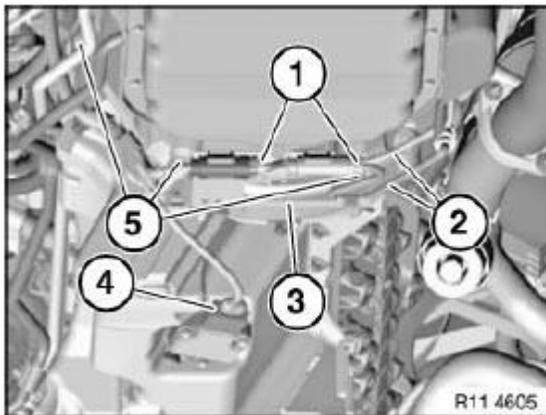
Identifying Plug Connection, Electrical Lines And Holder
